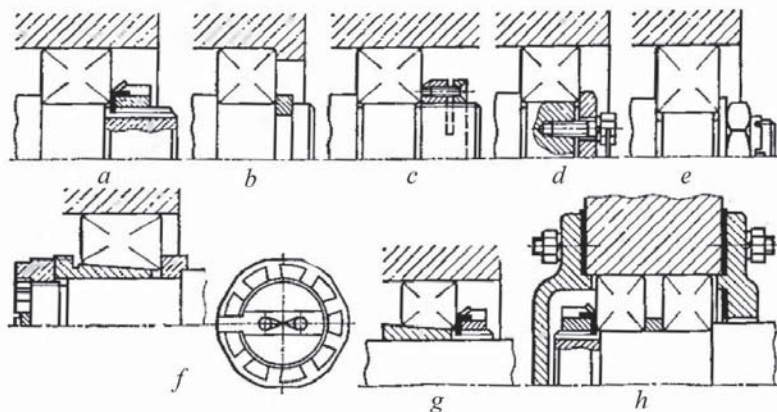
Fastening the inner ring of bearings to the shaft [15]:
